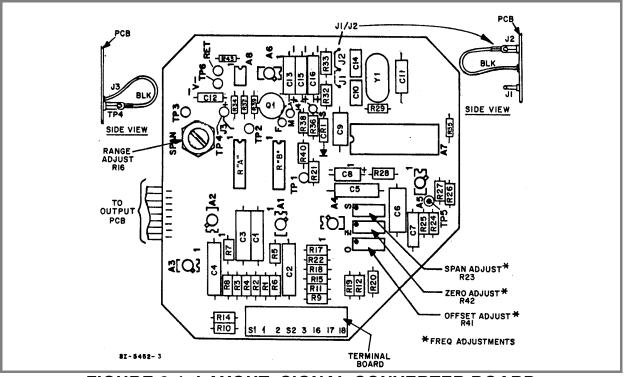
LAYOUT, SIGNAL CONVERTER BOARD
